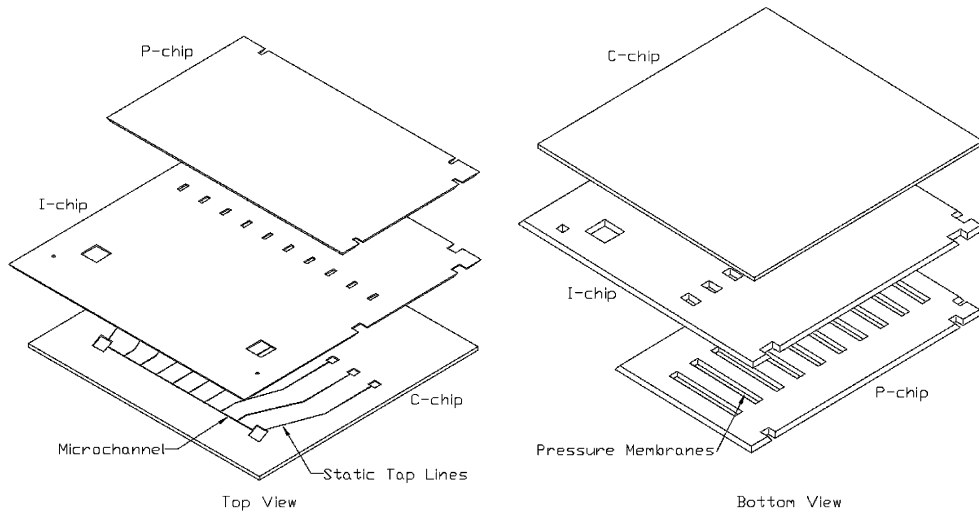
Microfabricated test-section components, exploded top and bottom views.
